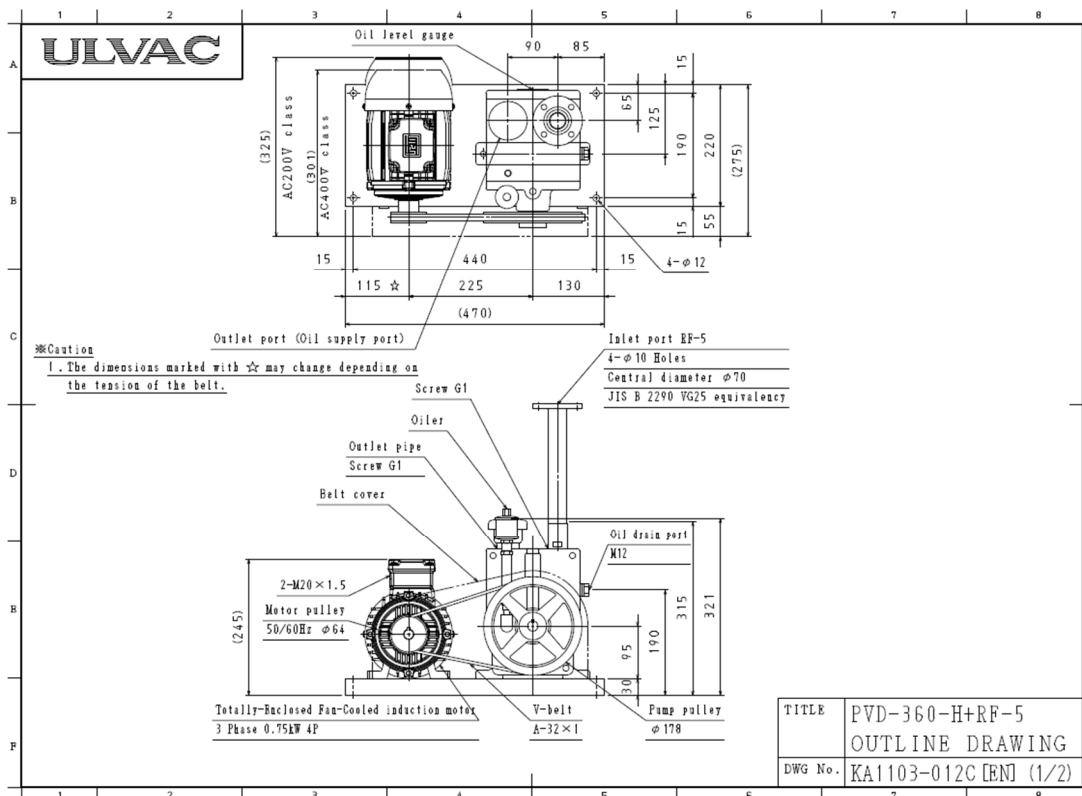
Dimensional drawing PVD-360-H+RF-5
